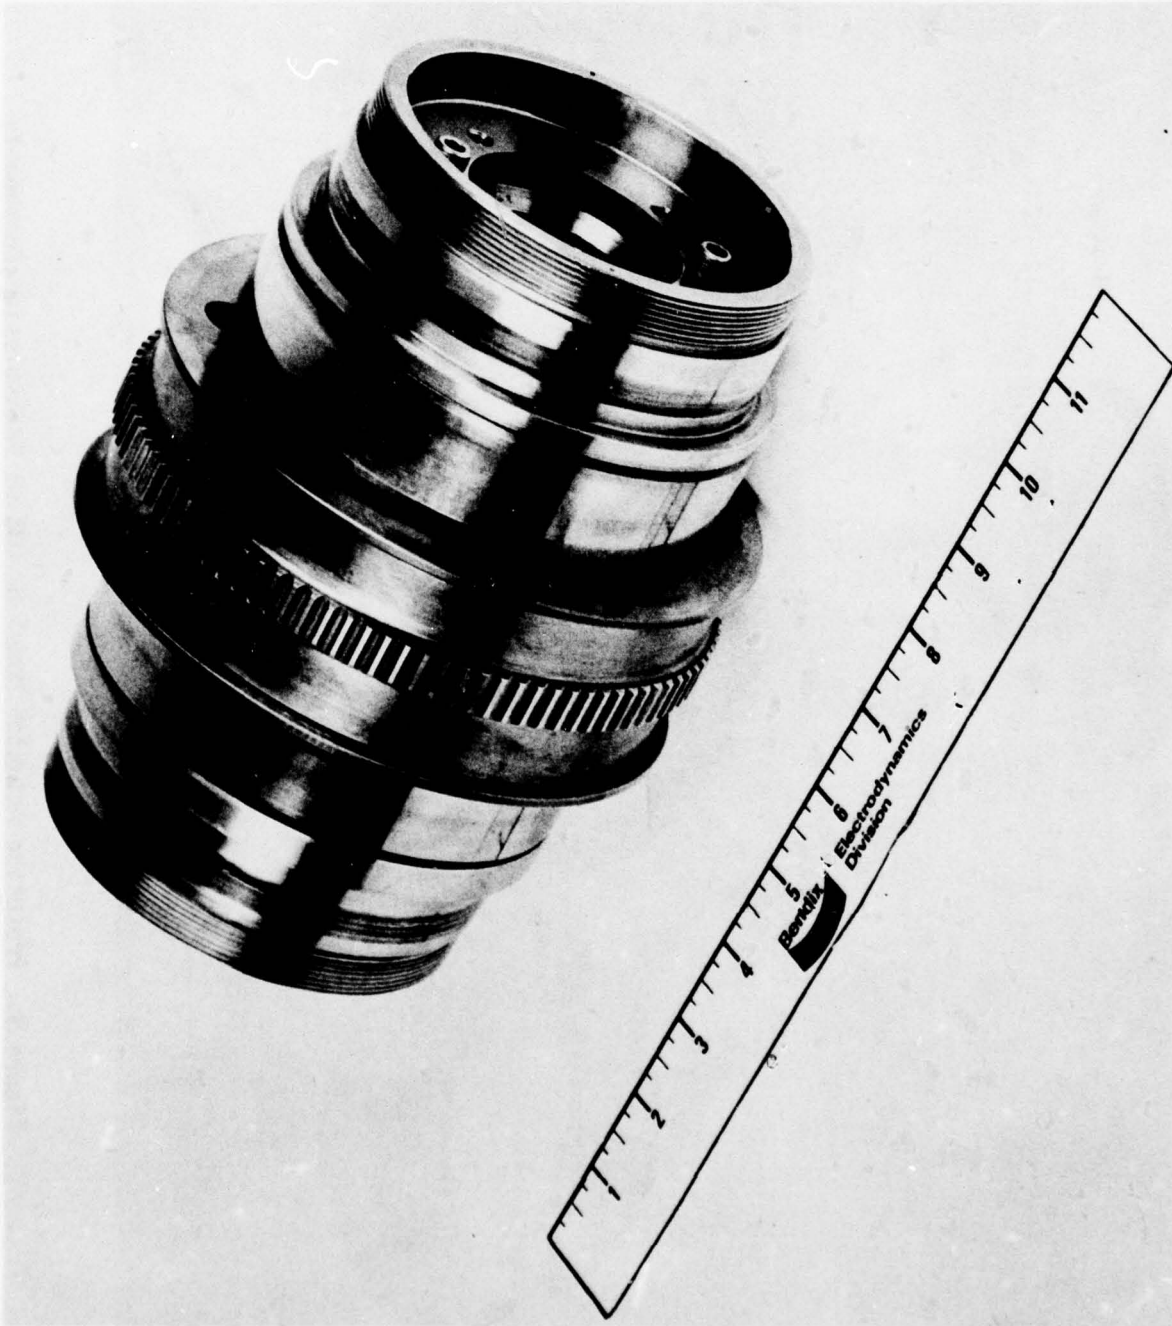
Motor Cartridge Test Unit Output Shaft Assembly
